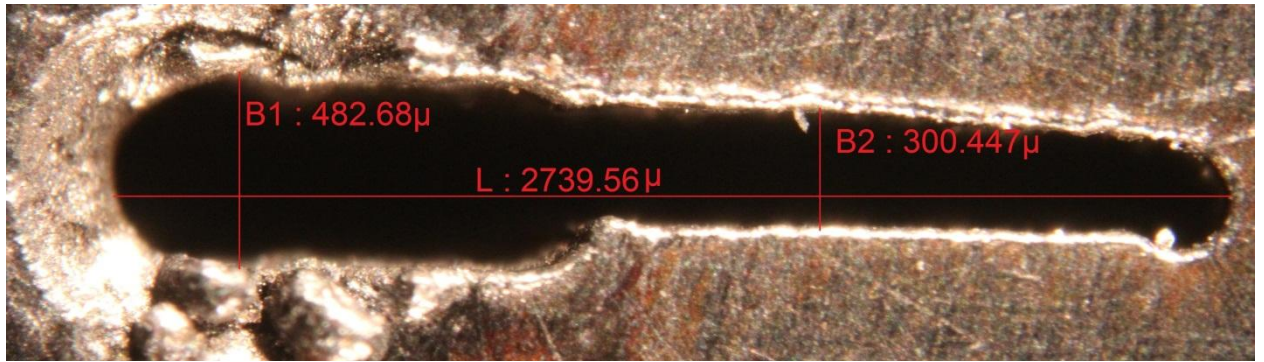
Laser 7 with dimensions that shrunk 40%, image taken post-weld, L/D of 2.1
